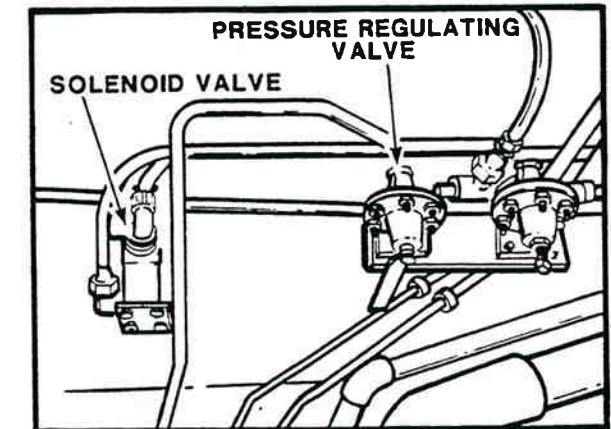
Axle Unload Solenoid Valve and Pressure Regulator.
